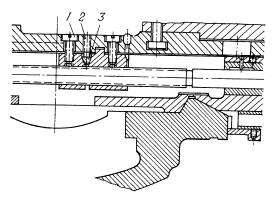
Two-section nut with a wedge for periodical backlash adjustment: 1-clamping screws; 2-adjusting screw; 3-wedge
